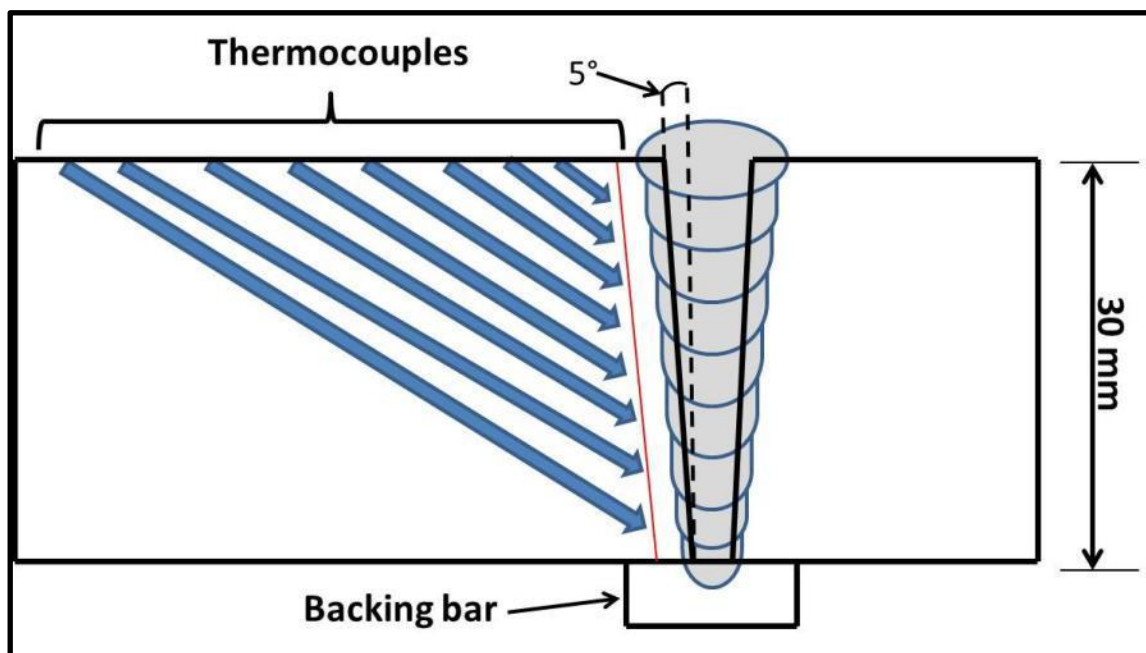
Tandem MIG welds thermocouple arrangement
